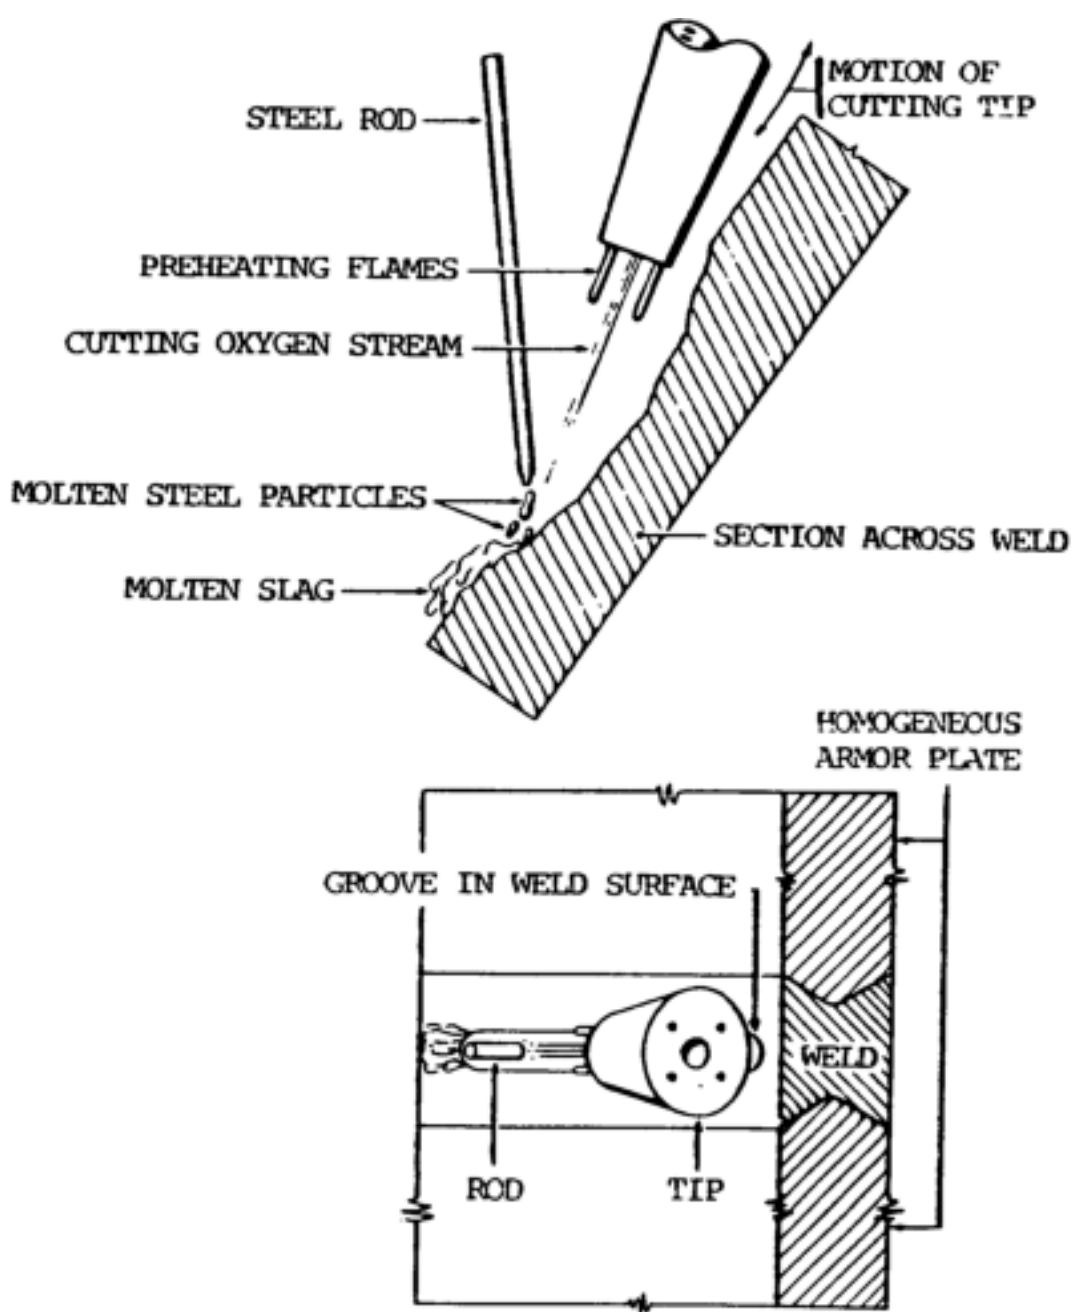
Method of removing surface defects from stainless steel welds.
